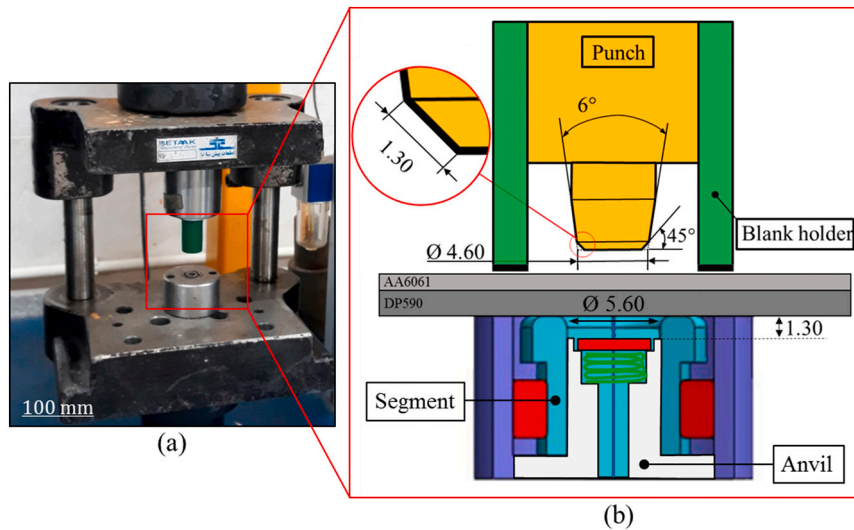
(a) Clinching process die setup and (b) main dimensions of the tools (mm).
